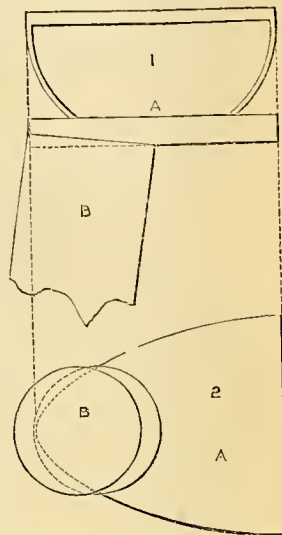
IRON AS ANVIL FOR TINS, ETC. 1, Side View; B, Plan.
